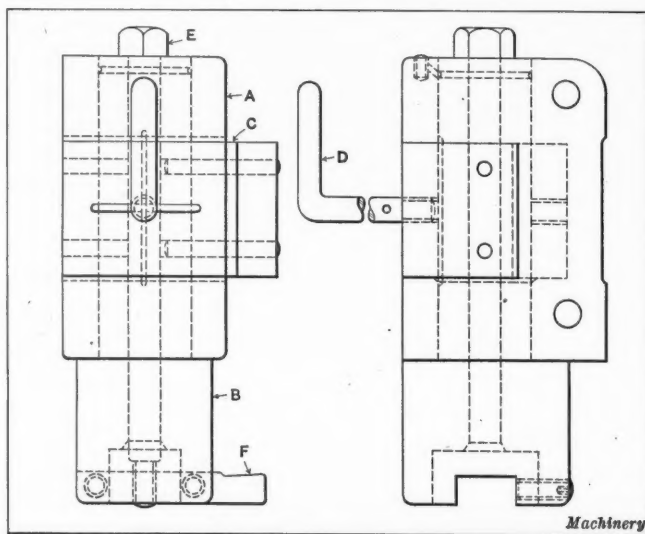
Side Swiveling Toolpost for Use in planing Under Surfaces
